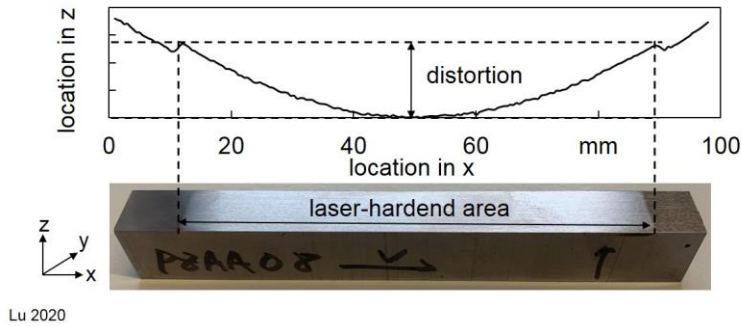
Multi-pass laser hardening using rectangular beam shape
